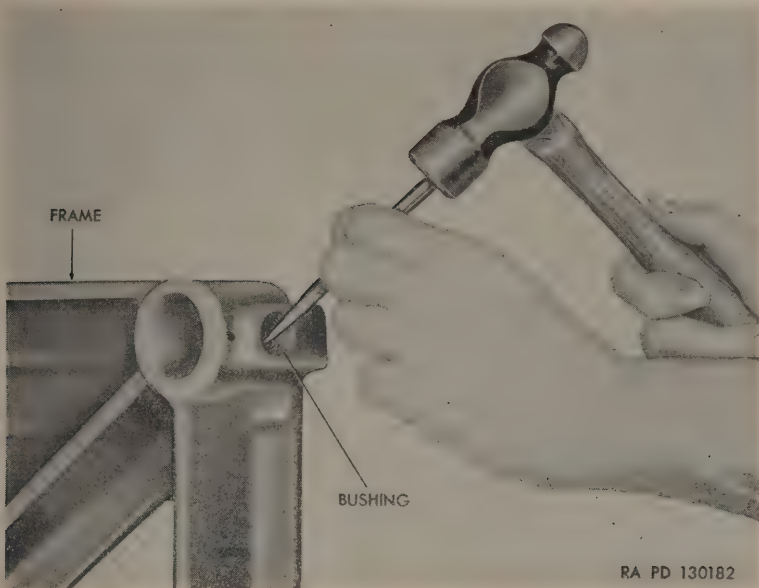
Cracking frame leg bushing with diamond point chisel—sound-ranging plotting board M1 or M1A1.
